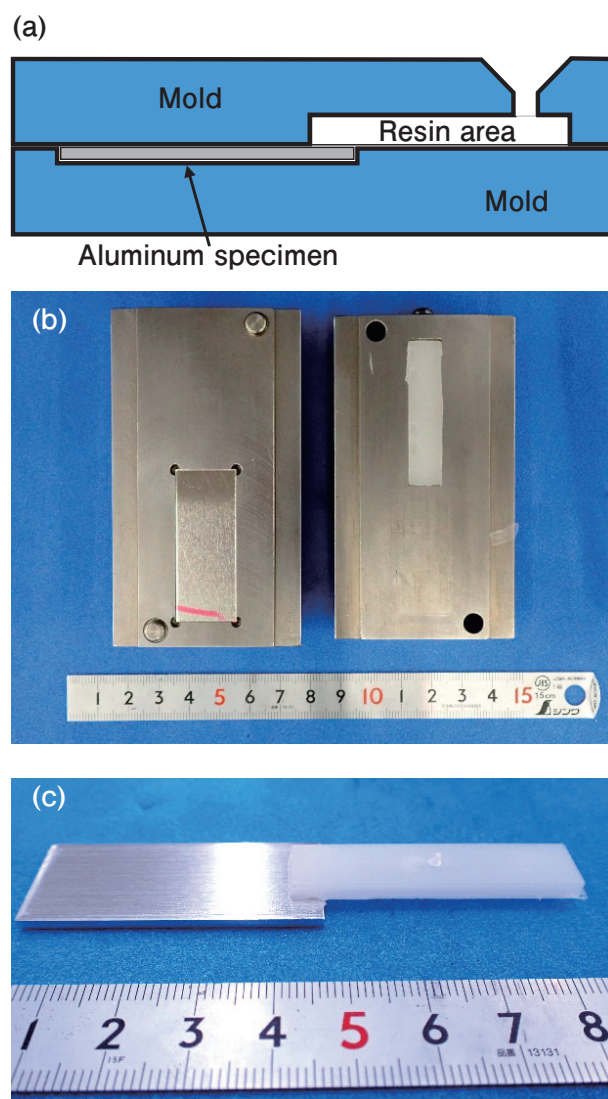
(a) Schematic illustration of mold and aluminum specimen during injection process. Appearance of (b) bare aluminum sheet and injected PP resin in the opened mold after injection and (c) joining sample of the KO treatment sheet and PP resin.
